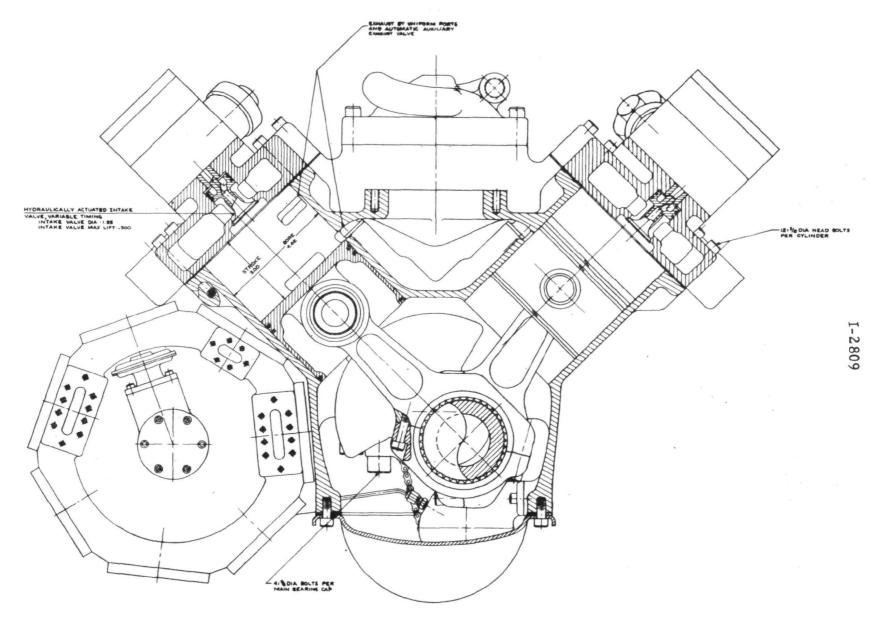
Expander Layout with American Bosch Valving - Cross Section Through Front Cylinders.
